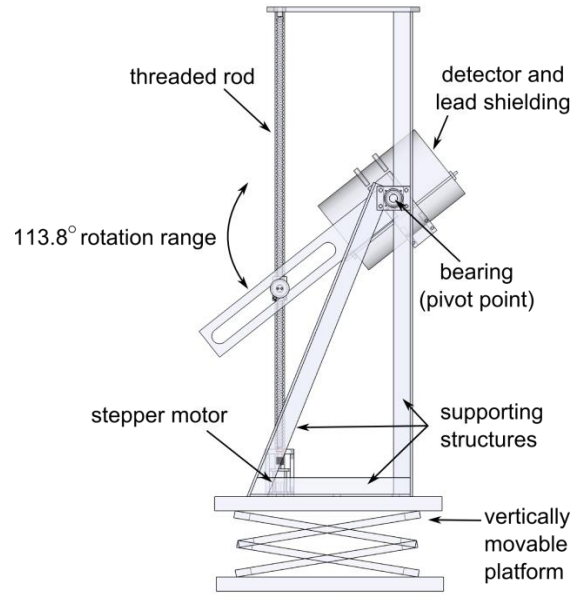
A drawing of the rotation drive with the detector shielding mounted on it.
